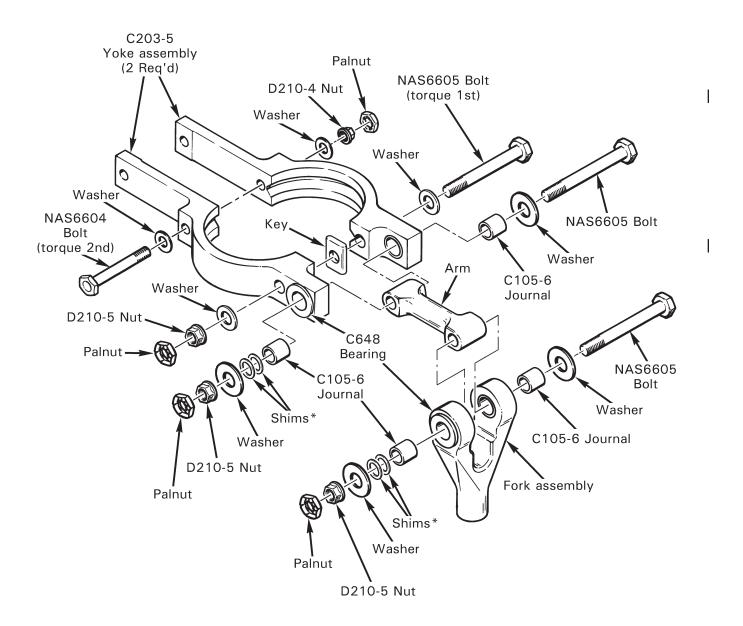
R44 EARLY REVISION CHORD ARM YOKE INSTALLATIONS
